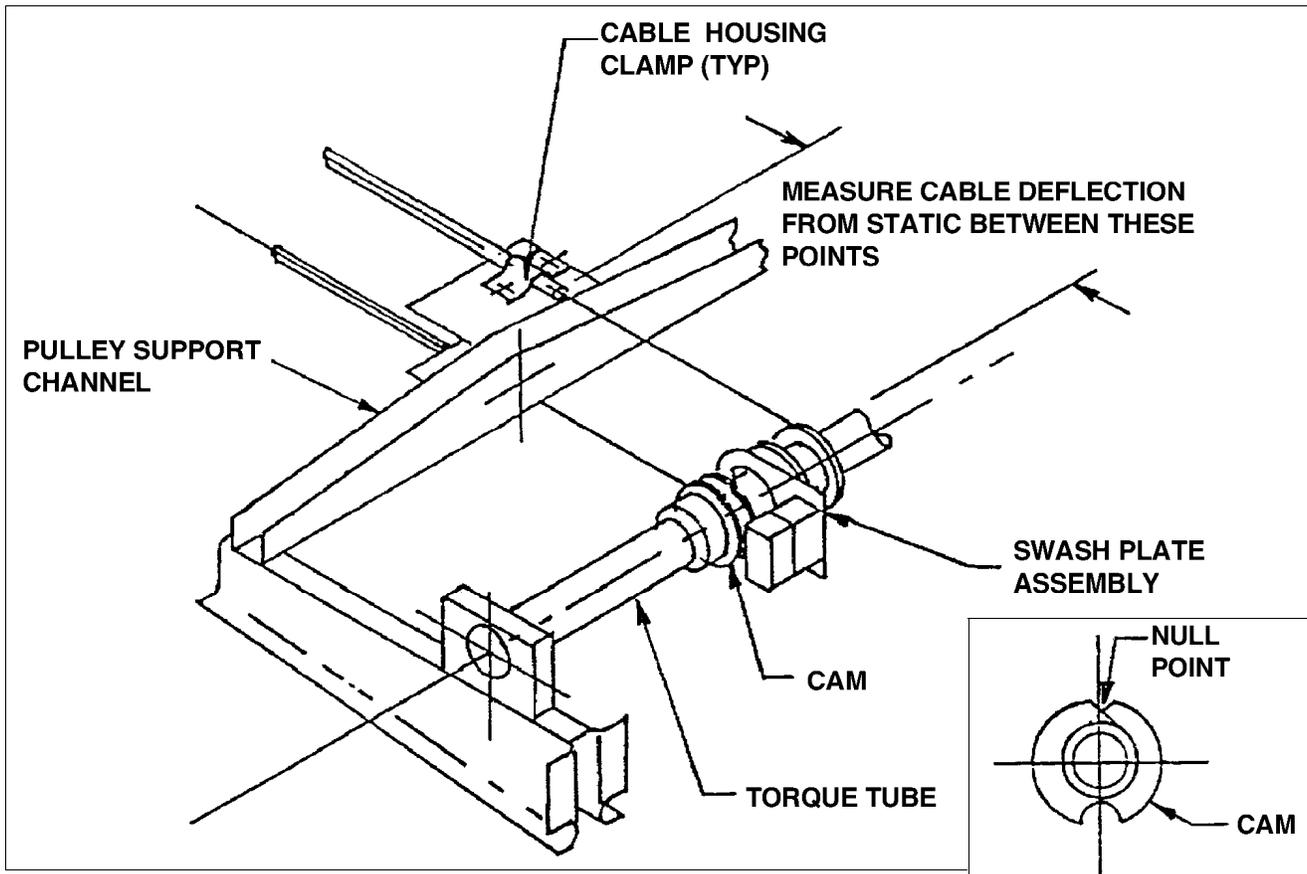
Electrically Operated Flap Torque Tube Assembly
